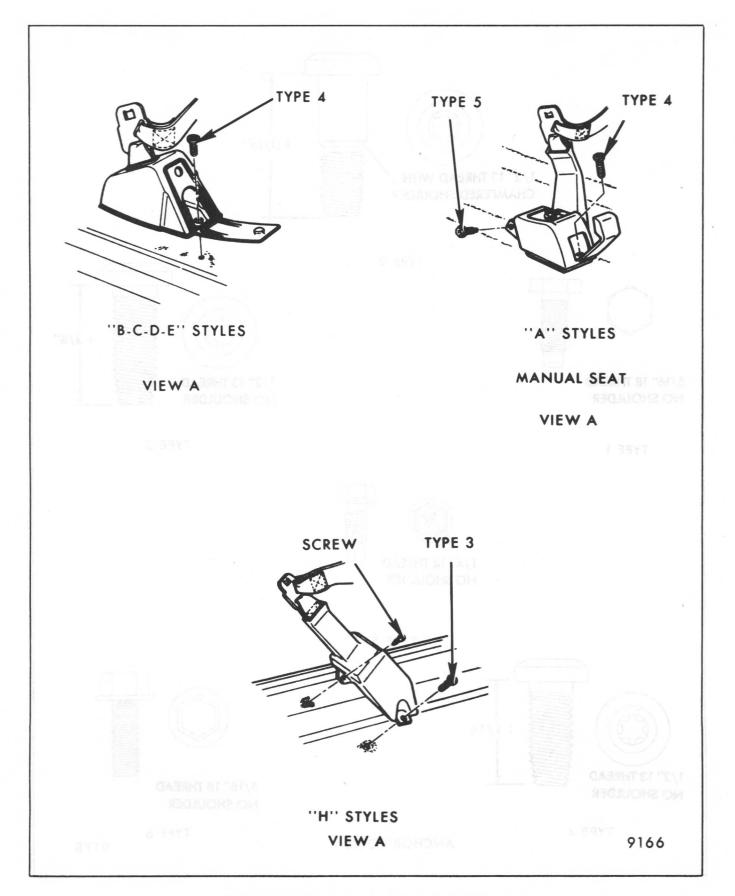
Front Seat Outer Lap Belts and Retractors
